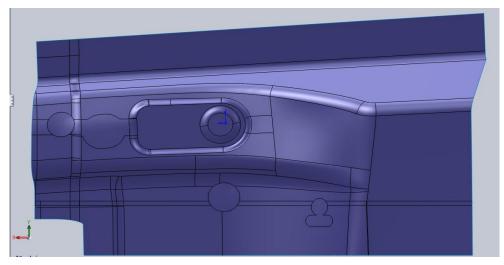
Shape of initial stamping internal reinforcement of car bodyshell B-pillar after treatment blinding holes and surfaces extension in software Solid Works 2008 before adjusting for the creation of die model.
